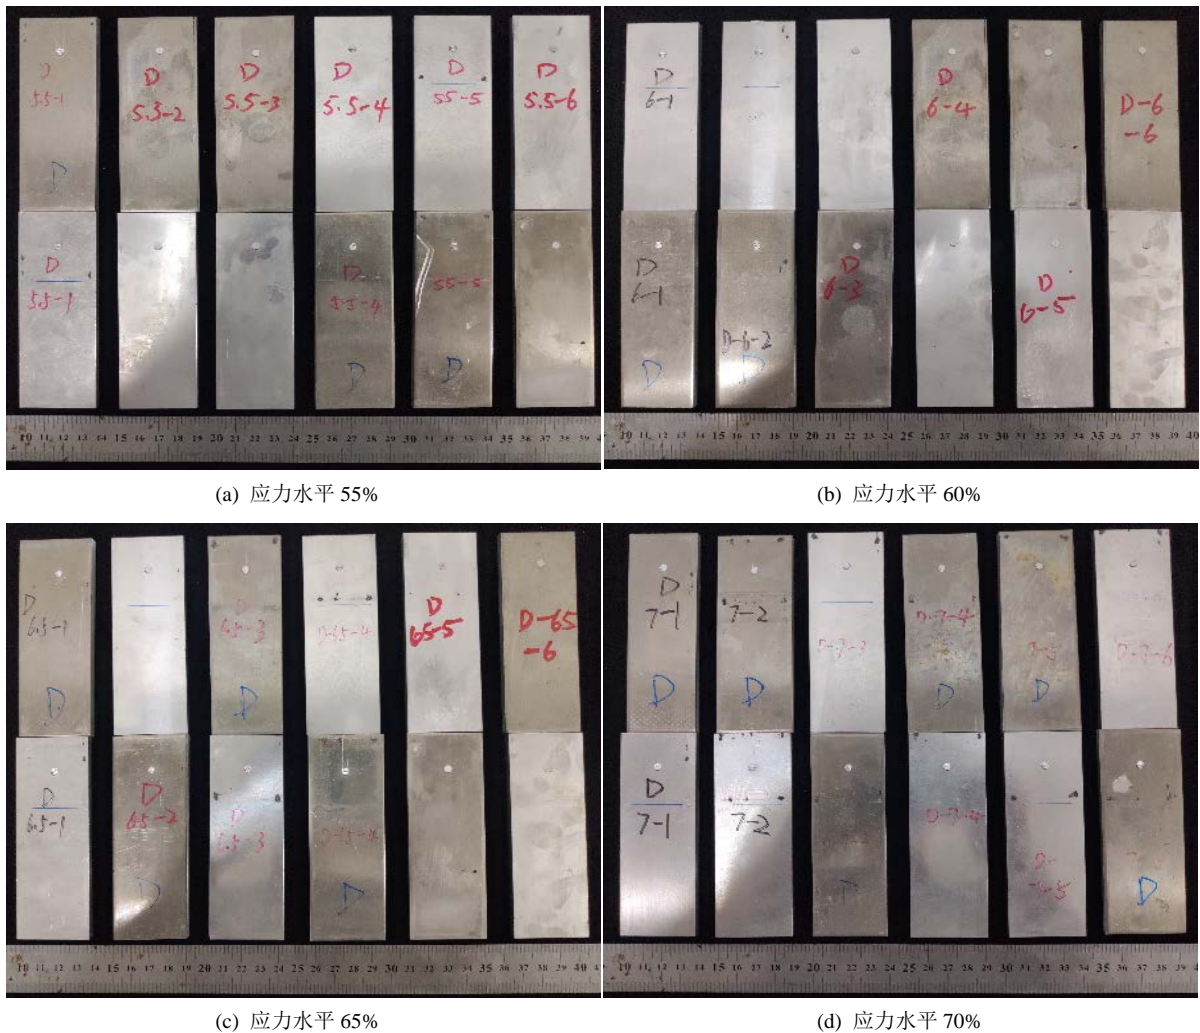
Fatigue failure modes of electromagnetic riveted joints
